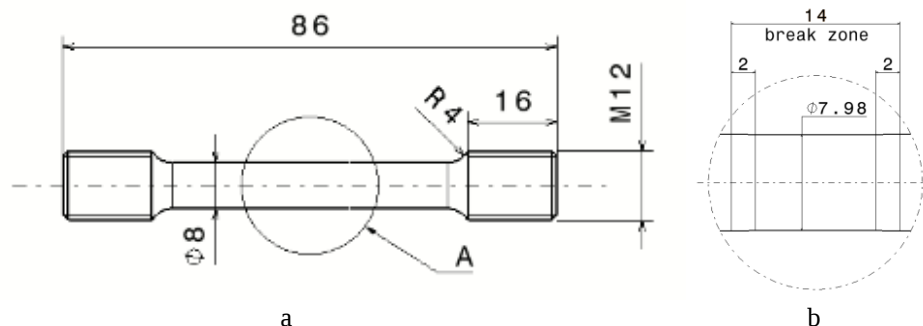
Material test pieces design: a. overview, b. detail A (break zone)
